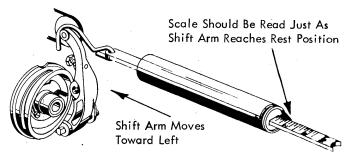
Spring Scale Measurement For Rotate Spring Adjustment
